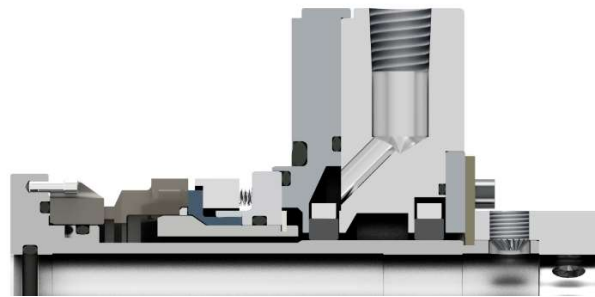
High-Duty Crude Pipeline Seal utilizing non-pusher secondary seal and dual bushing containment
